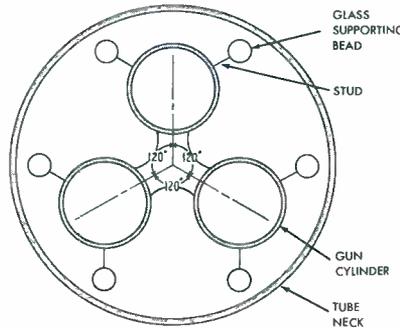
End View of the Three-Gun Assembly in the Color Picture Tube.
